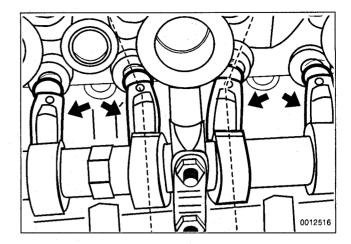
Correct installation position of rocker arms (arrows) on M44 engine.
